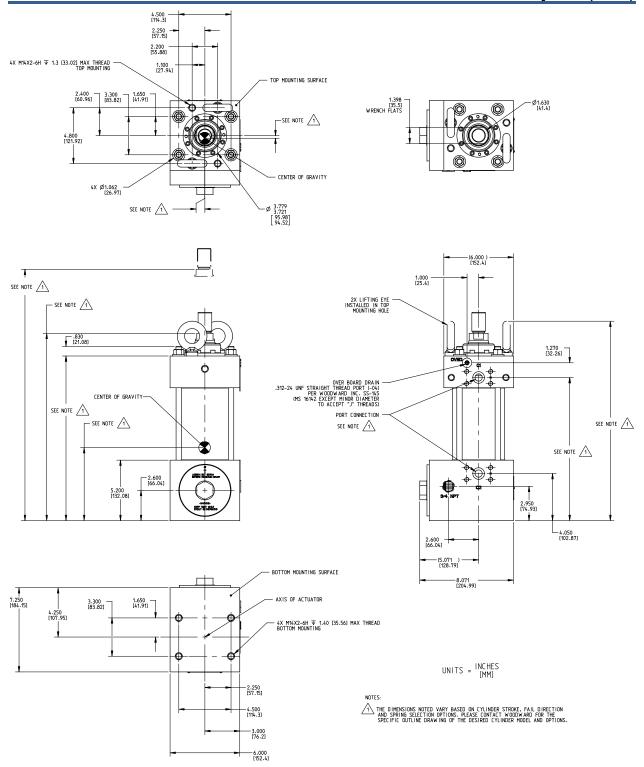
VSPC 4 inch bore, Installation Dimensions for Remote Cylinder
